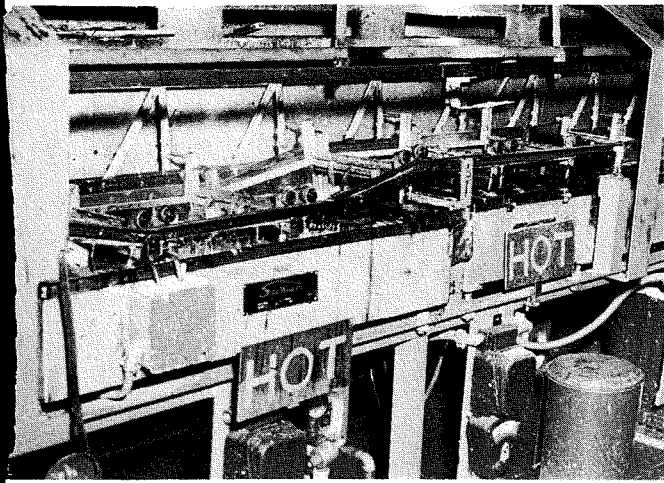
All components are soldered to the printed circuit in one operation. Conveyor tracks are depressed to pass printed wiring surface through a solder bath.
